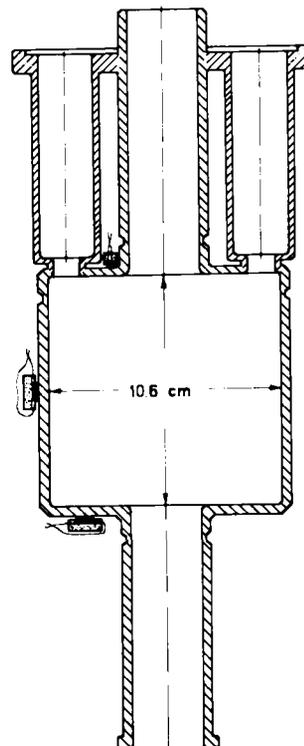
Schematic drawing of S-band cavity with beam tubes. The cavity is constructed out of several niobium parts that have been electron beam welded together. The welds are shown as thinned walls in the drawing. Carbon resistors used to detect heat pulses are indicated schematically.
